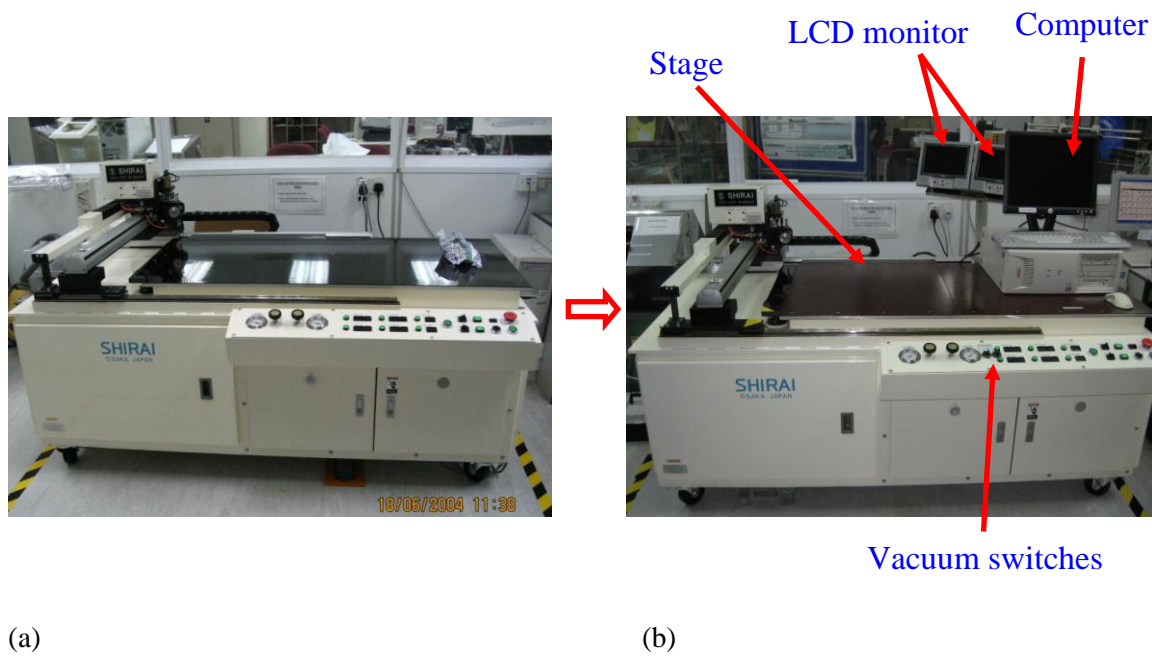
(a) Photography of the glass scribing machine before changing;
